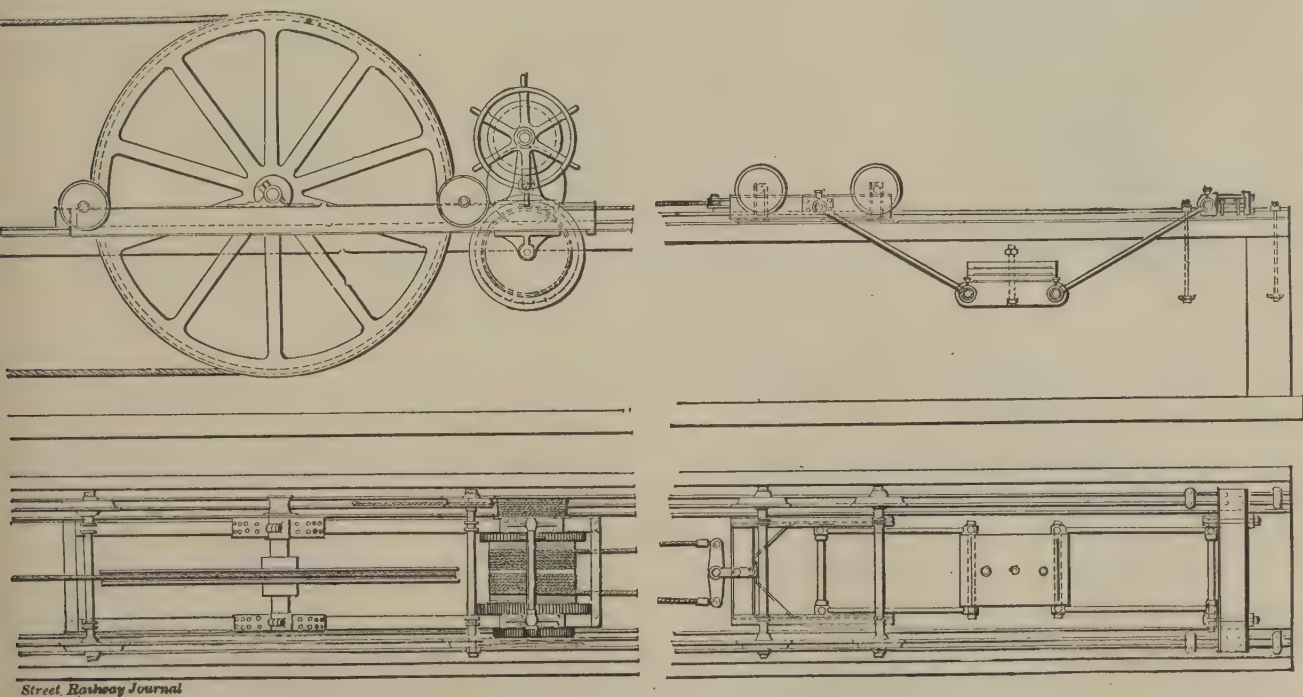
SIDE ELEVATION AND PLAN OF CABLE TENSION APPARATUS.
